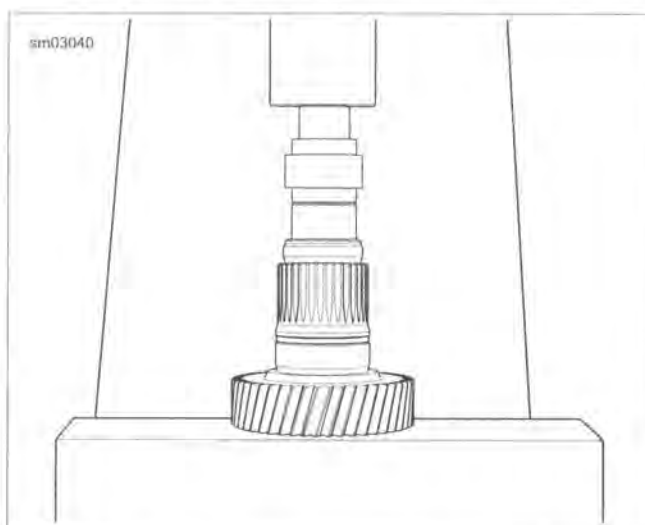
Installing Outer Needle Bearing in Main Drive Gear
